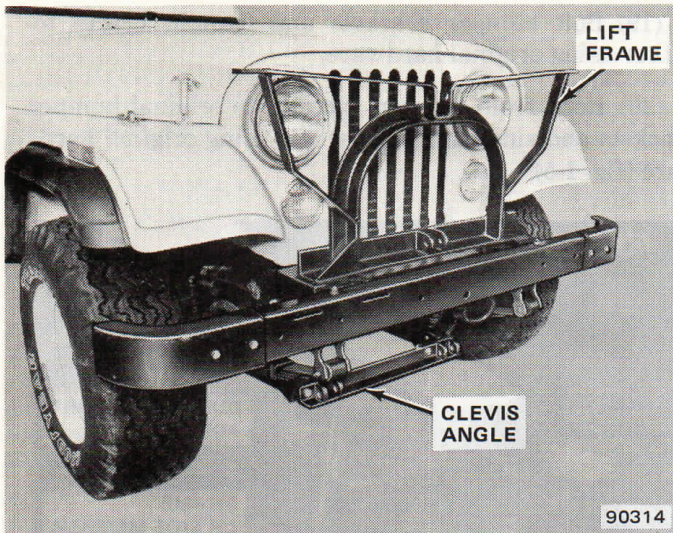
Lift and Mounting Frame Installed—CJ Models
